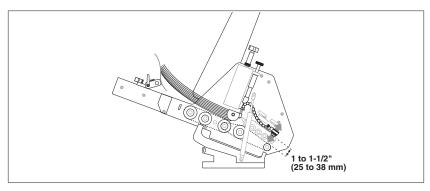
Adjusting Photo Sensor for Sheet Stopping Distance
